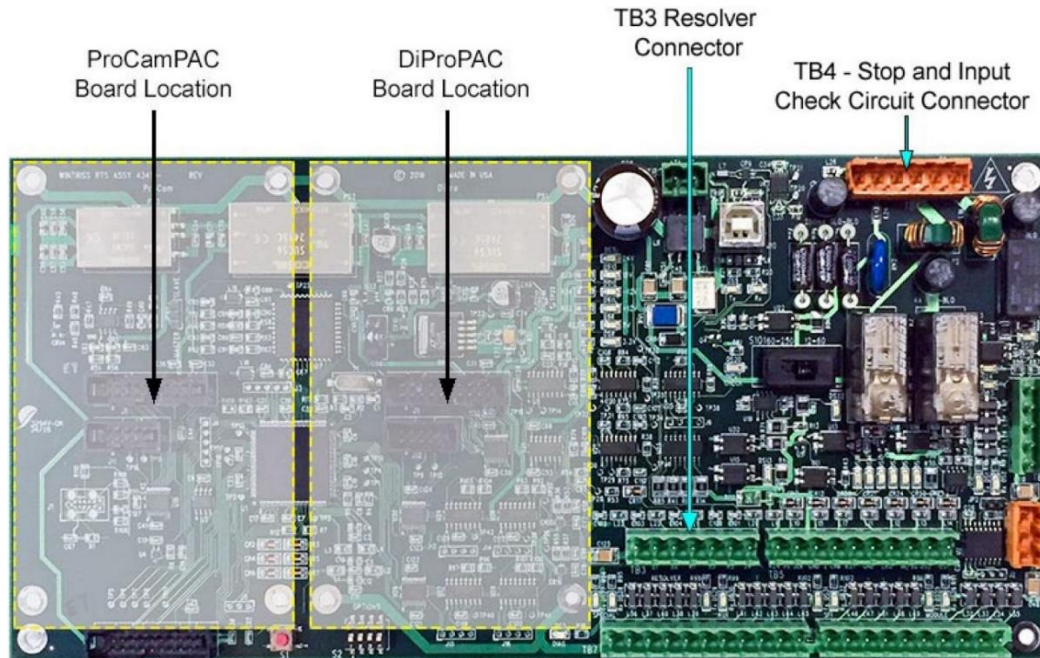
SmartPAC PRO Main (RTS) Board Showing Location of Option Module Boards, and TB3 and TB4
